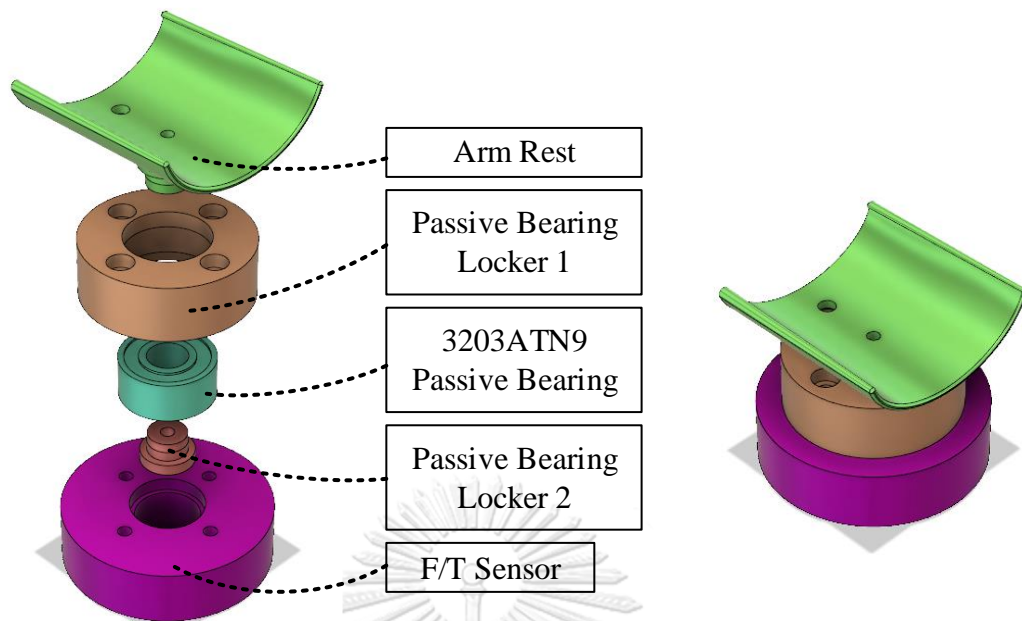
Passive joint parts before assembled (left), assembled (right)
